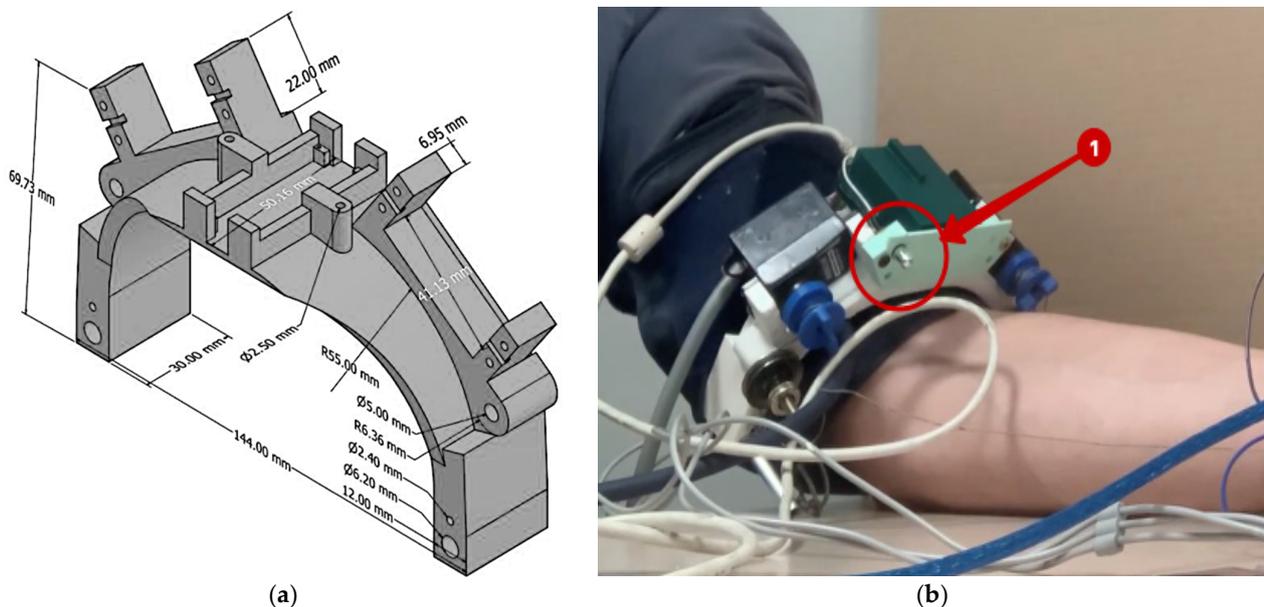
Arm ring platform of L-CADEL v.3 prototype: (a) a CAD model and (b) the built prototype installed on a user's arm. (1 is the button for changing the motor's rotation).
